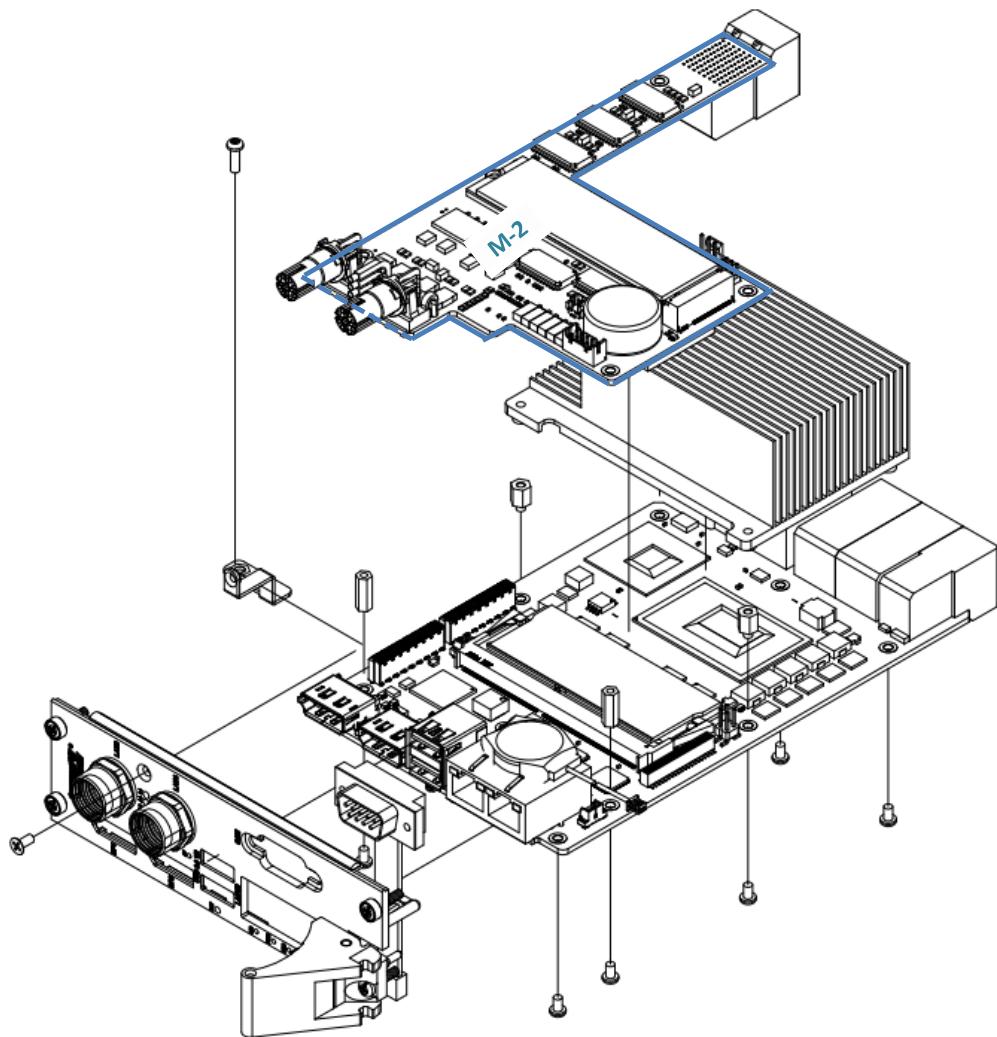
MIC-330 with M-2: 8HP front panel with I/O ports & SO-DIMM socket expansion
